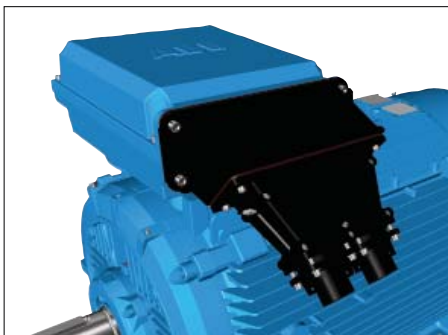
Terminal box for motor size 315 LK. Adapter and cable sealing end unit.
